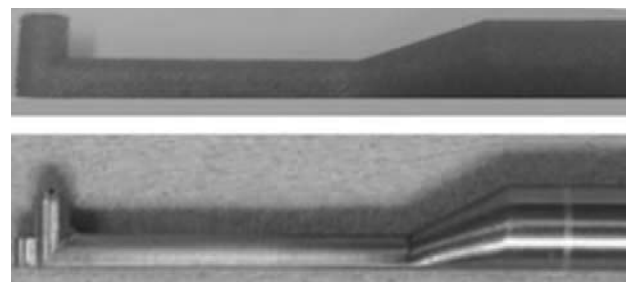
5-hole probe based on SLS (top: raw part, bottom: finished probe)
